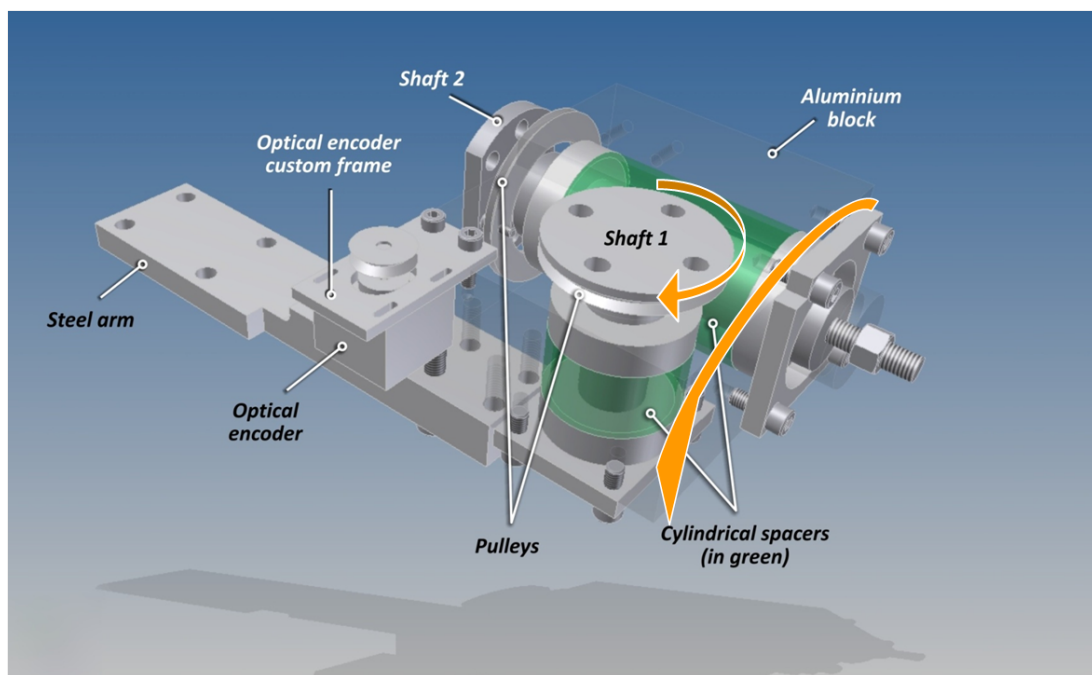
2-DOF block assembly. The orange arrows indicate the direction of rotation provided by shaft 1 and shaft 2
